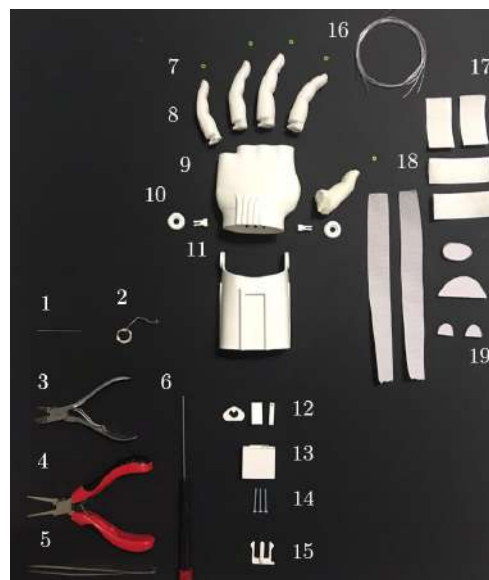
Third prosthesis' components and needed tools for its assembly: 1. Needle; 2. Thread; 3. Cutting plier; 4. Round nose plier; 5. Fine tip tweezers; 6. Phillips head screwdriver; 7. Rings; 8. Fingers; 9. Metacarpal region; 10. Thermo pins and caps; 11. Gauntlet; 12. Whippetree, swivel pin and thumb tensioner pin; 13. Gripper box; 14. M2.5 screws; 15. Retention clip; 16. Guitar strings; 17. Velcro tape; 18. Grosgrain ribbons; 19. Adhesive foam.
